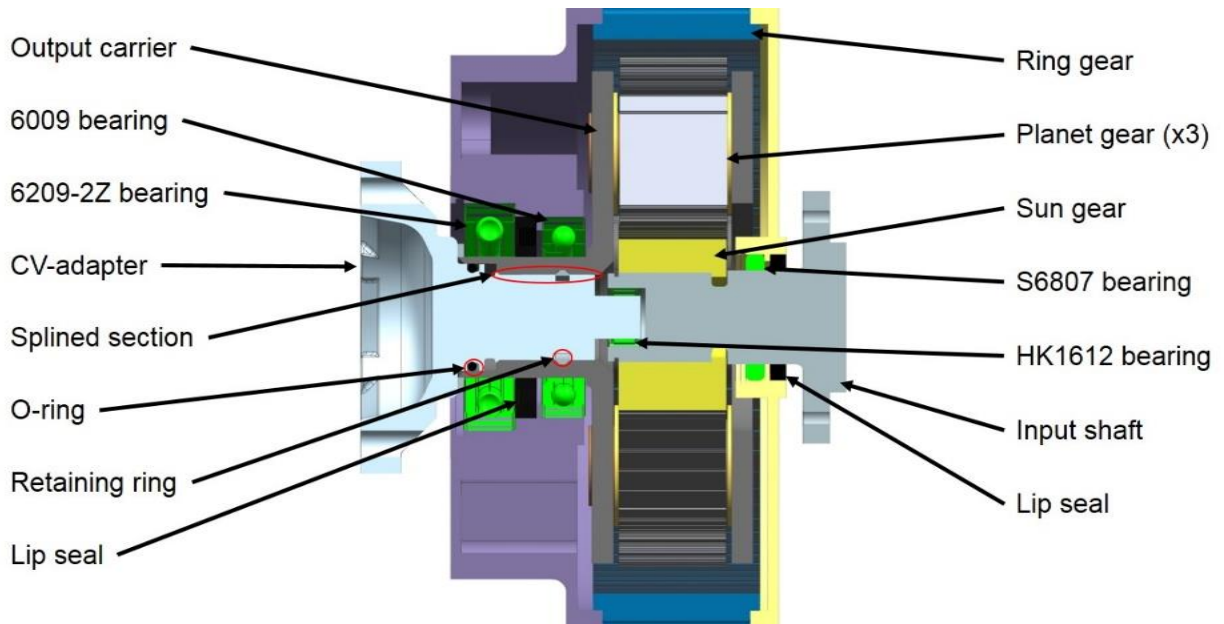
Gearbox cross-section view with details for CV-adaptor part
